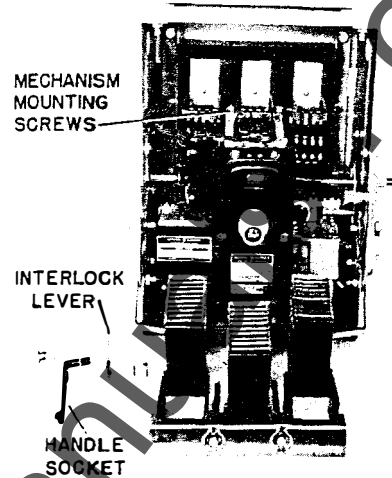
Arc Quenchers and Handle Socket Removed from Drawout Breaker
